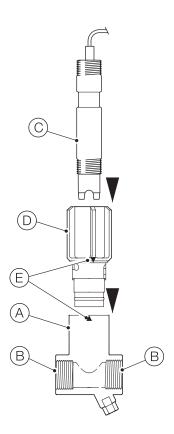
Bayonet T-piece assembly installation - BSP/NPT
